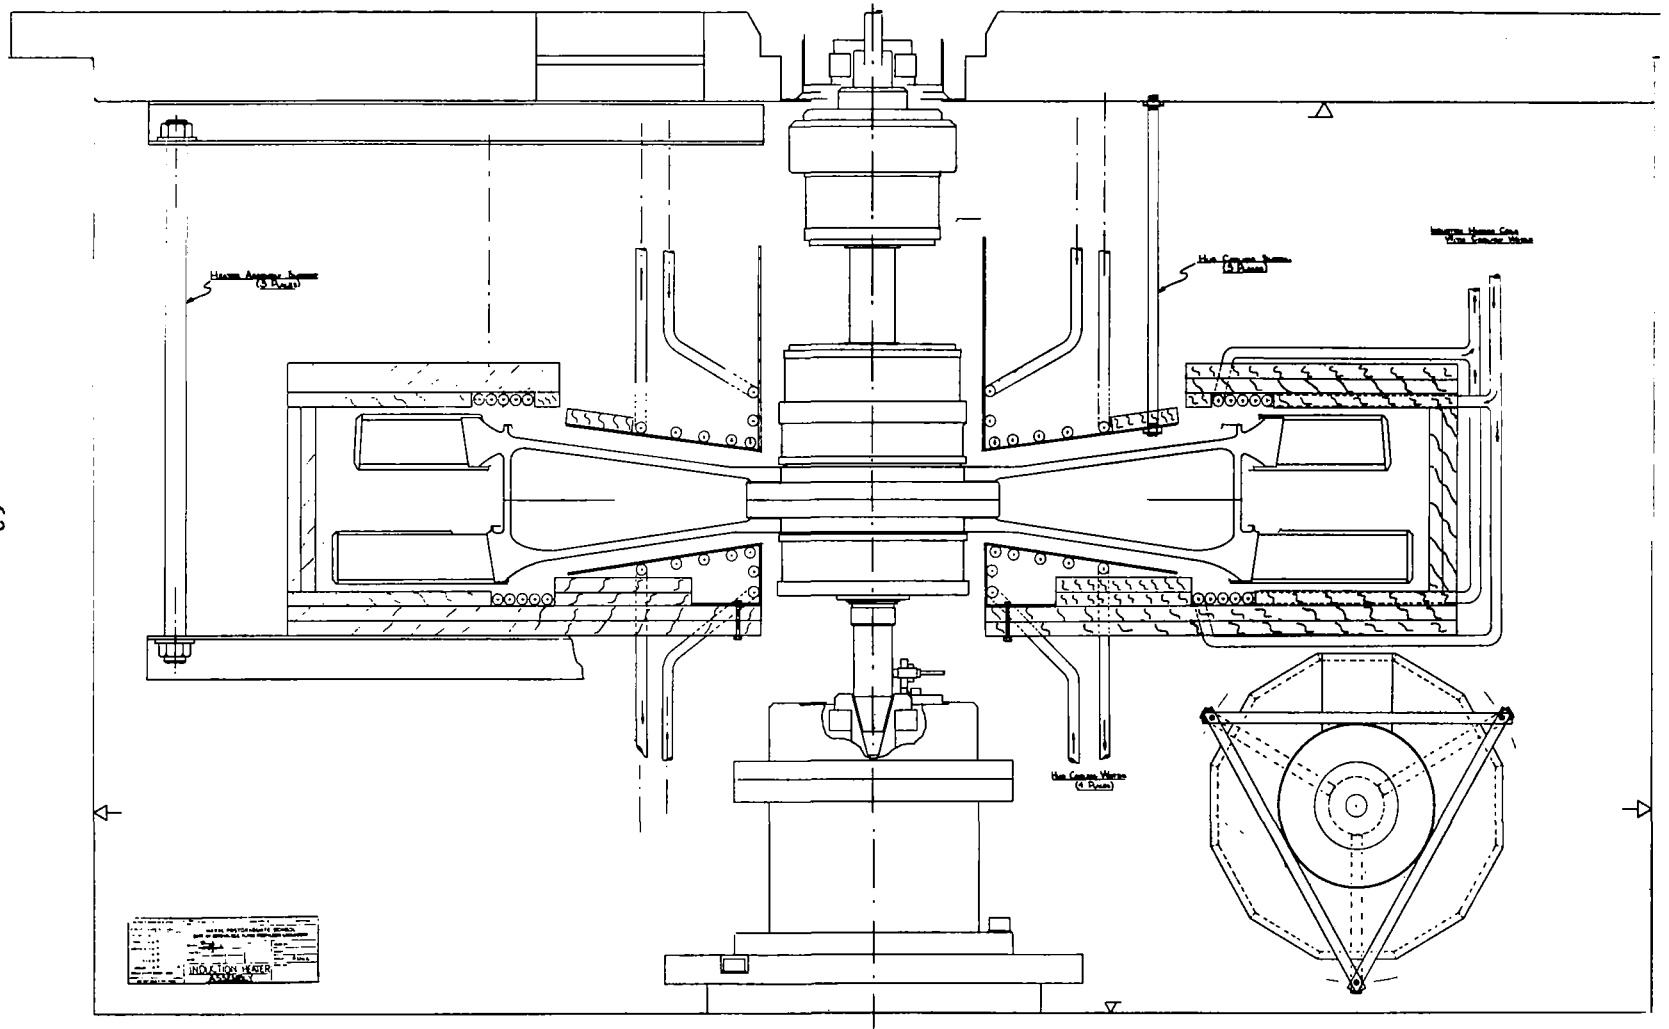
CROSS SECTION OF HEATING COILS AND HUB COOLING PLATES
